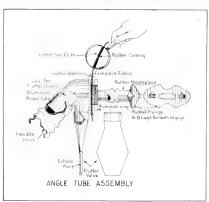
Tube Assembly Showing Rubber Mouth-Piece, Flutter Valve and Flexible Hose.
